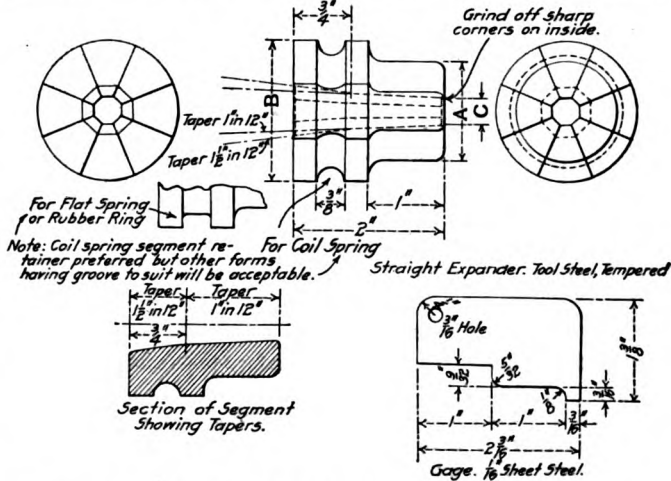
Straight Sectional Expander for Copper Ferrules and Boiler Tubes.
